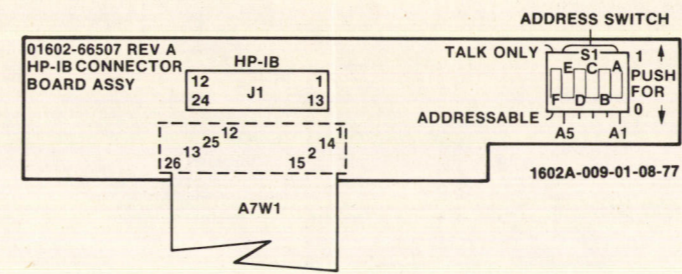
P/O Service Sheet 9, HP-IB Connector Board A7
